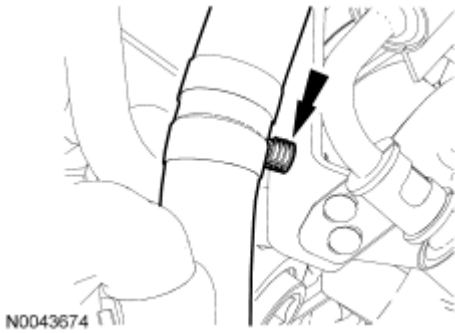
Locating PSP Hose Bracket Wiring Harness Retainer
